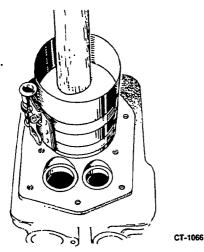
INSTALLING PISTON AND CONNECTING ROD
